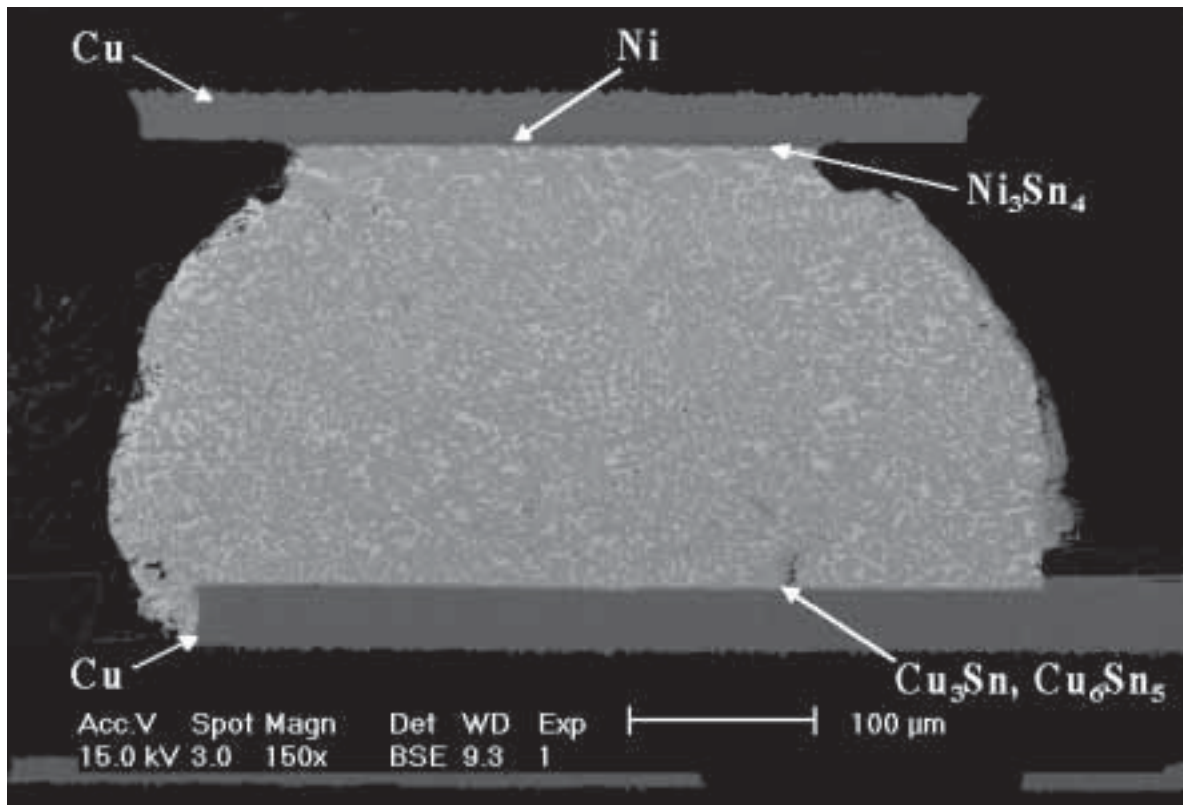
Cross section of semiconductor component and interconnection to printed wiring board (PWB). (Solder joint diameter 0.4 mm.)
